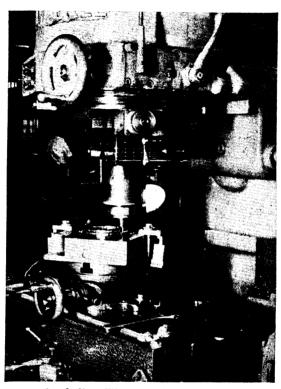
This rotary-head die-milling machine, commonly used to machine the impressions in die-casting dies, is designed so that all operations can be performed without moving the block.
